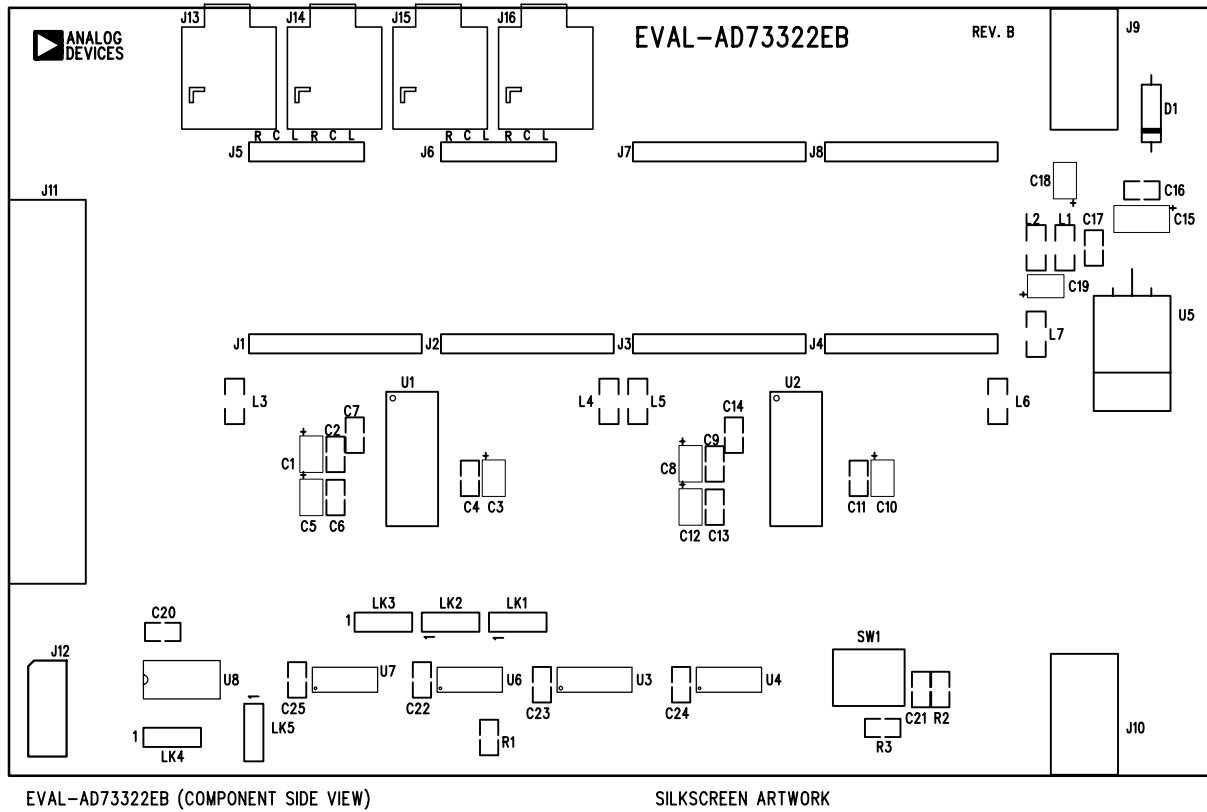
EVAL-AD73322EB Main Board Silkscreen
